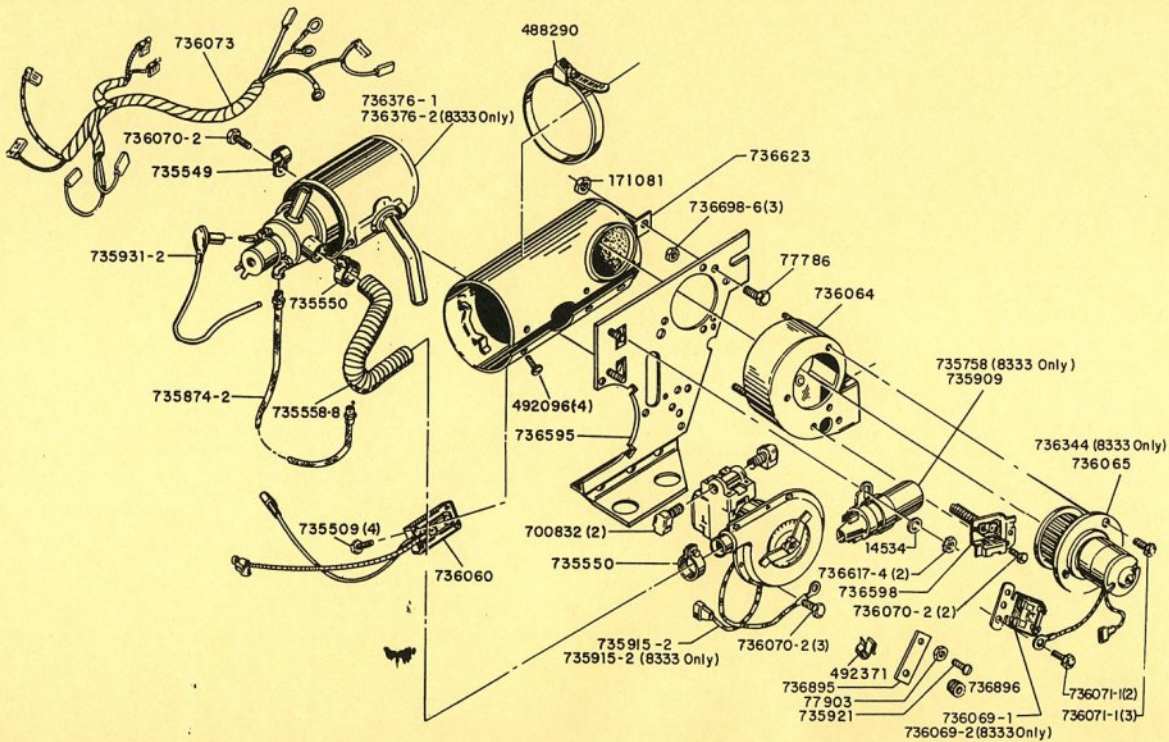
HEATER & BRACKET ASSEMBLY 736624-1 & 736624-2
